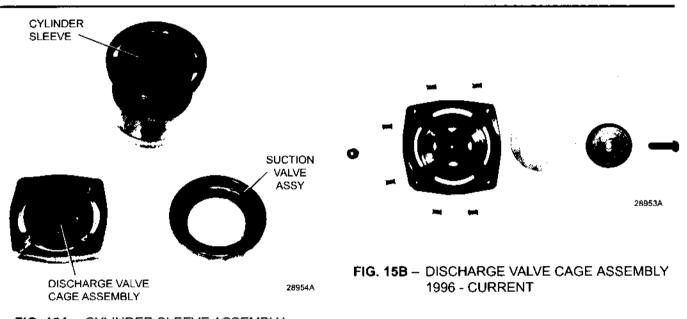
A - CYLINDER SLEEVE ASSEMBLY
